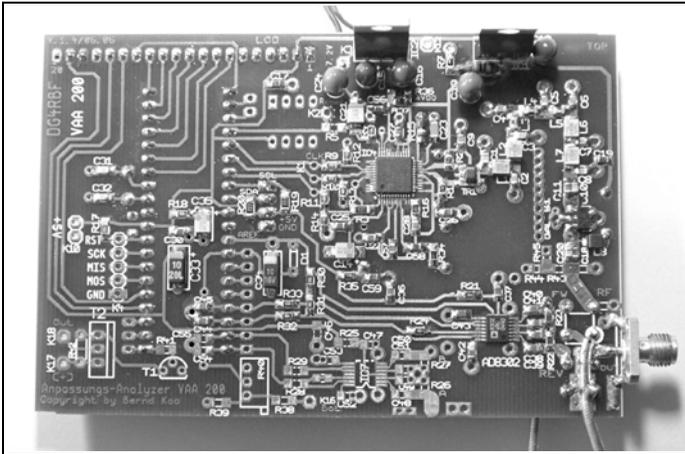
Picture of the track side of the vector analyser PCB showing the SMD components.
